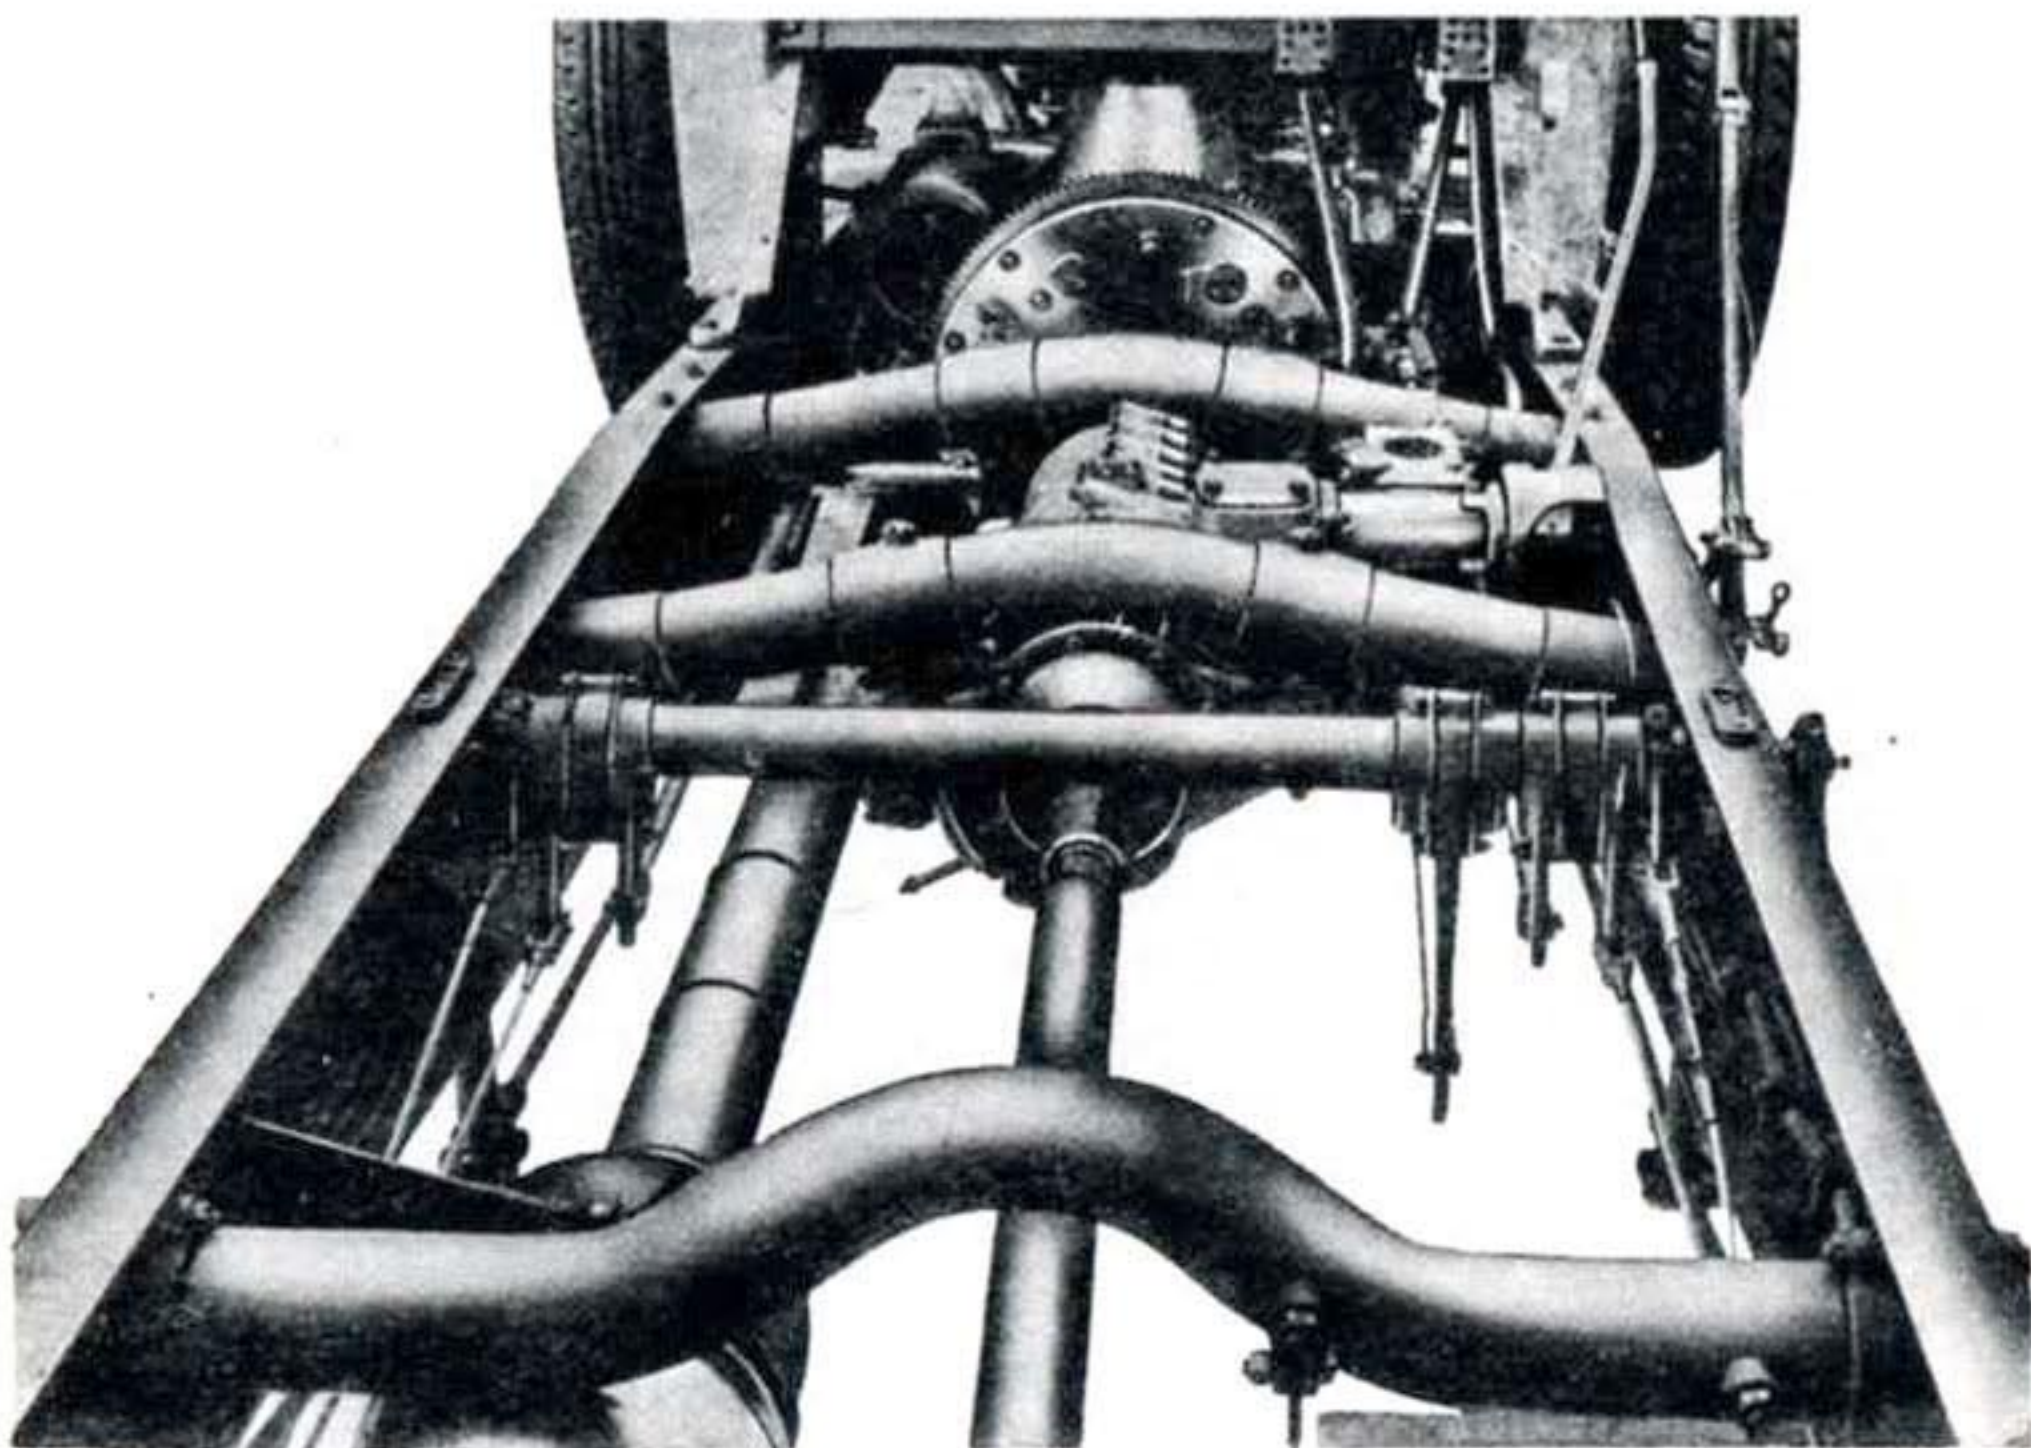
VIEW OF THE CENTRE OF THE CHASSIS SHOWING THE BRAKE COMPENSATING MECHANISM.
